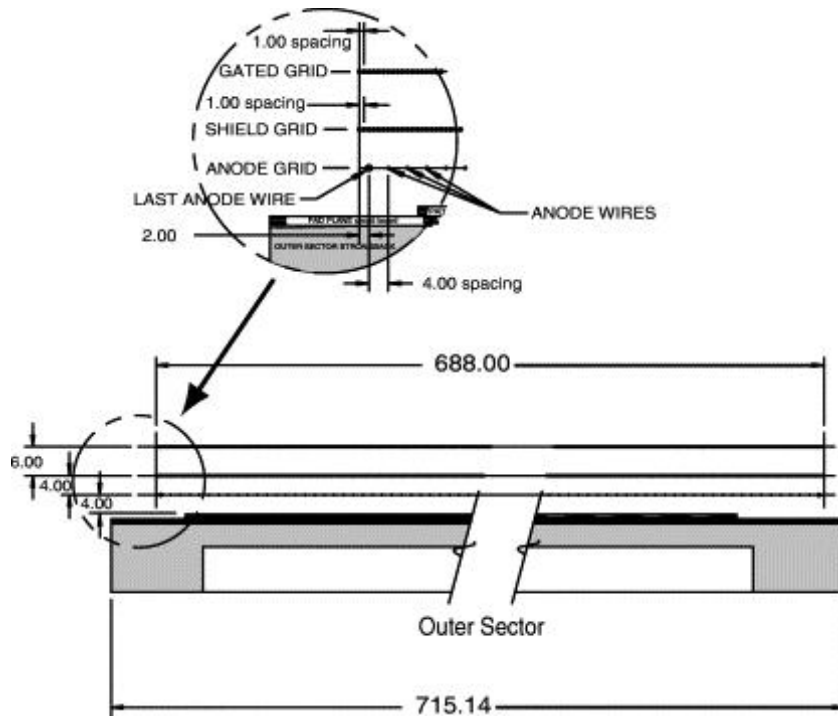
Cutaway view of the outer subsector pad and wire planes. All dimensions are in mm.
